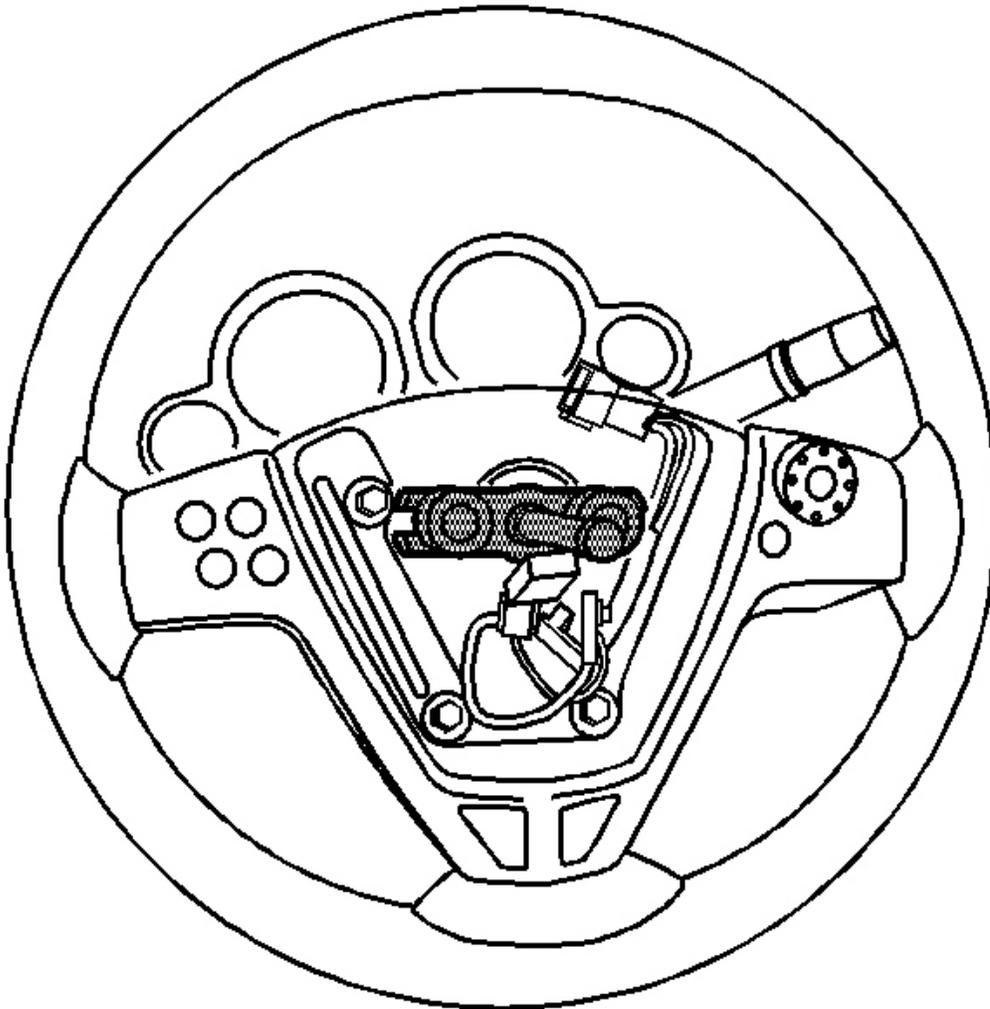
View Of Steering Wheel Control Switch Electrical Connector
